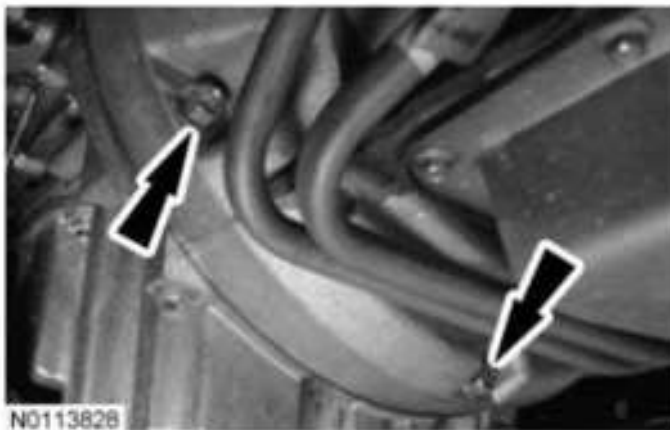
Locating Bellhousing-To-Oil Pan Bolts
